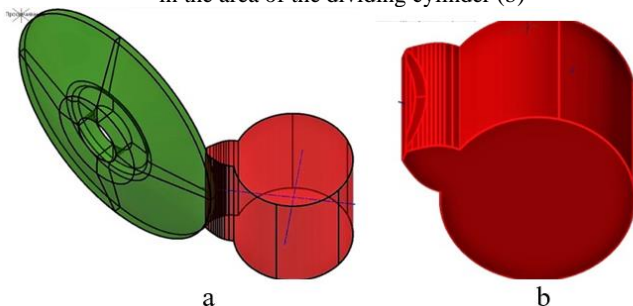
Contact spot between the dished grinding wheel (a) with the upper part of the involute tooth profile (b)
